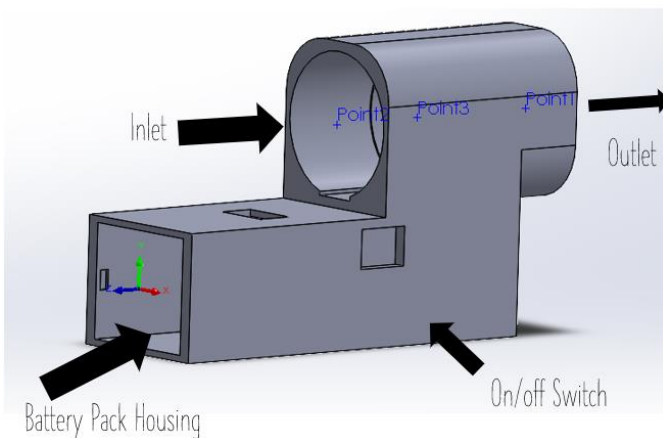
SolidWorks Housing Design and 3-D PLA Print
